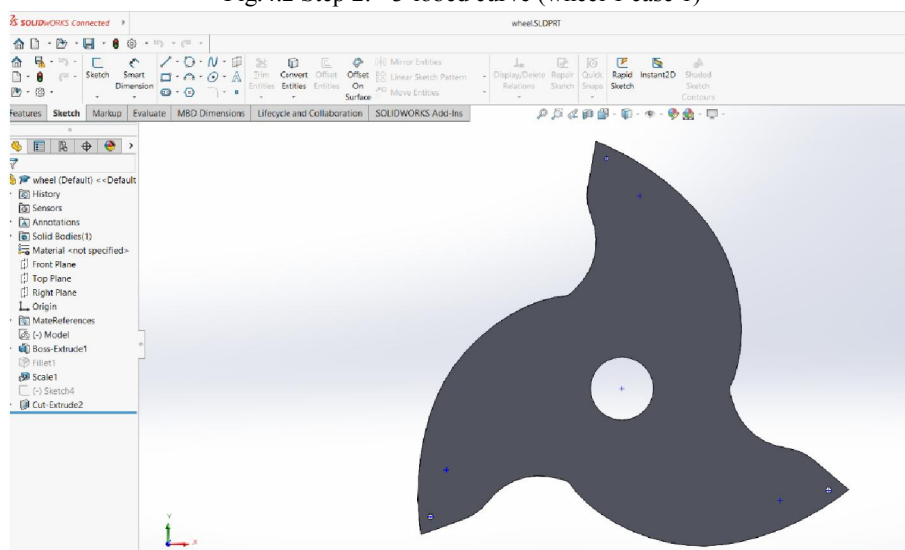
Step 3: - solid wheel part (wheel 1 case 1)
